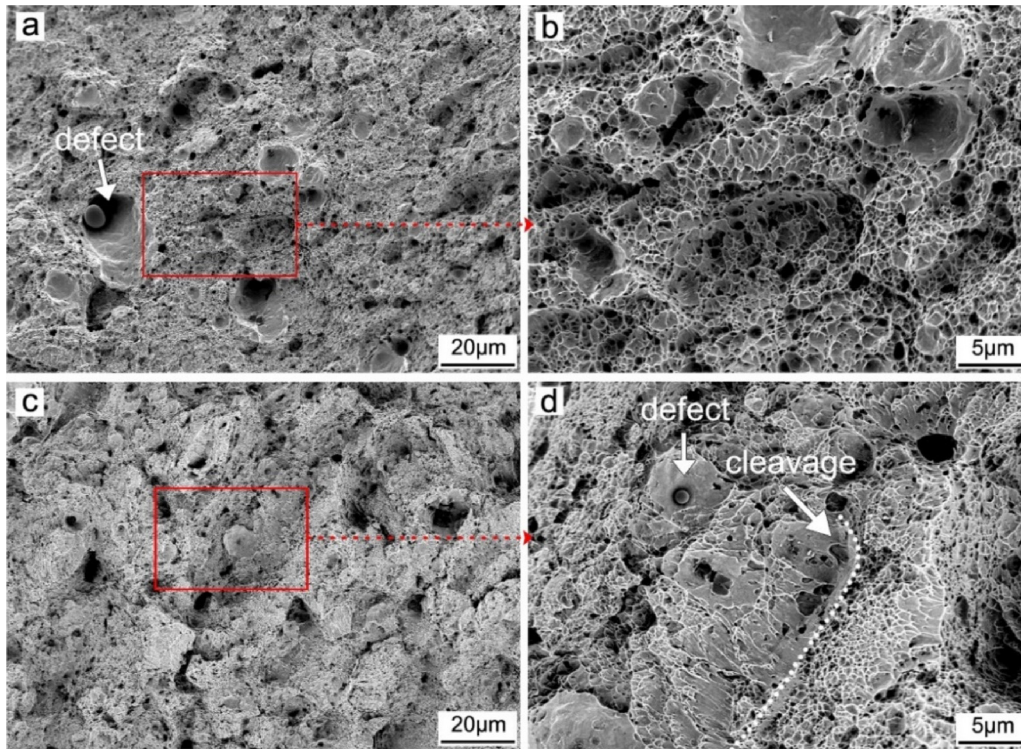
Fractographic images of the SLM maraging steel tensile samples: (a, b) Fracture surface of as-fabricated maraging steel and magnified view, (c, d) Fracture surface of aged maraging steel and magnified view. White arrows indicate balling defects.
